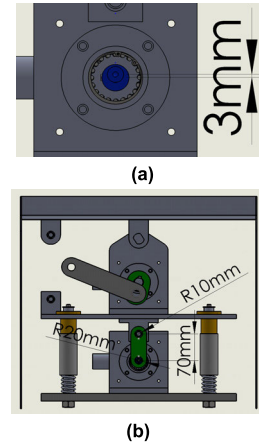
Dimensions of heave axis, (a) platform surface and (b) supporting frame.
